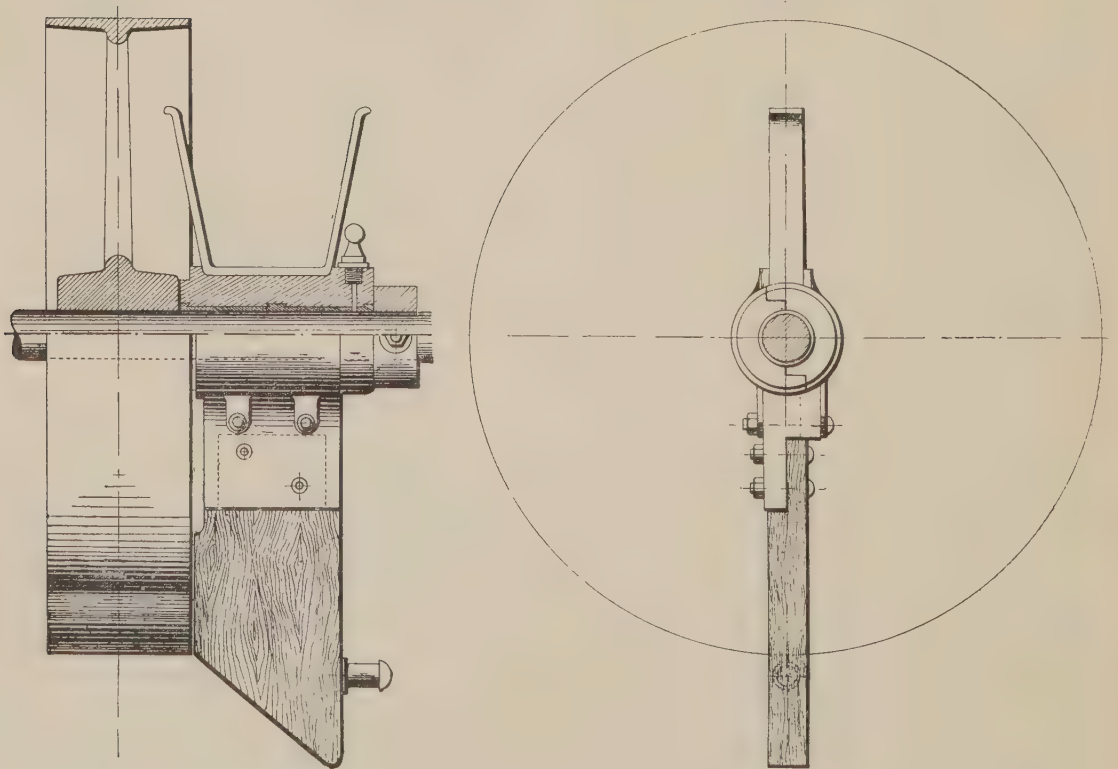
“BAUDOUIN” MOUNTER SUPPORTED ON SHAFT.
